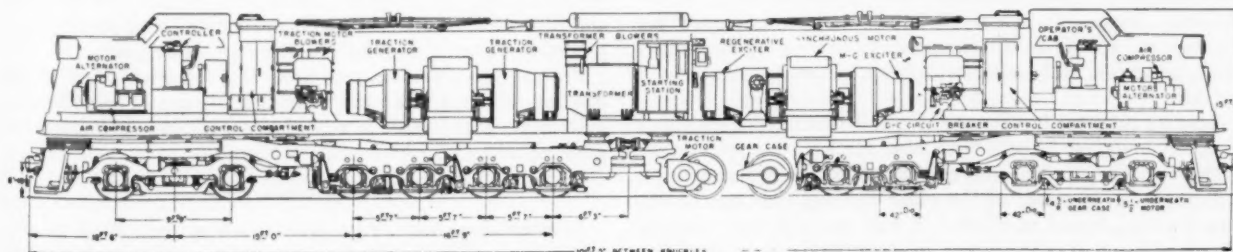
DIAGRAM SHOWING LAYOUT OF EQUIPMENT AND COMPONENTS OF 5000-HP ELECTRIC LOCOMOTIVE
